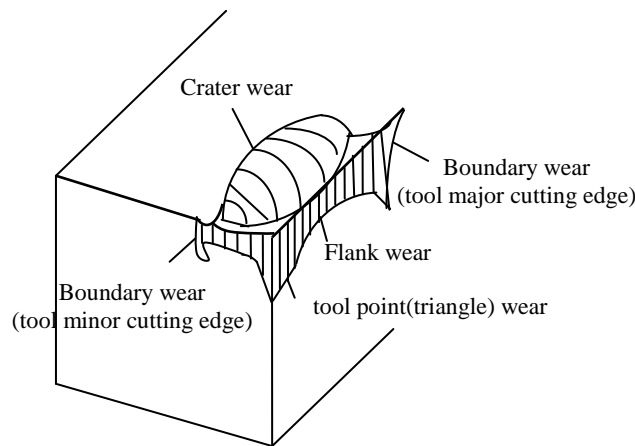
Typical Wear Morphologies of the High-speed Cutting Tool
